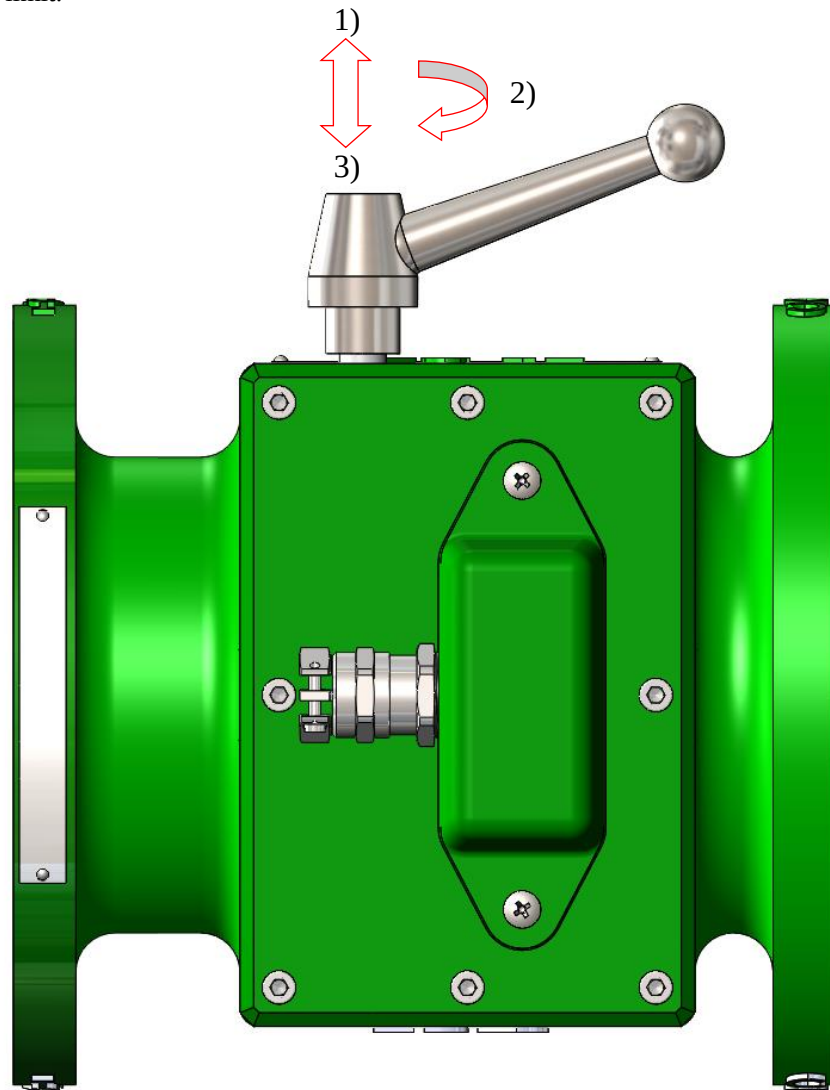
Disengage of the Lever from the Pivot Shaft on the TL34 SERGI CONSERVATOR SHUTTER.
